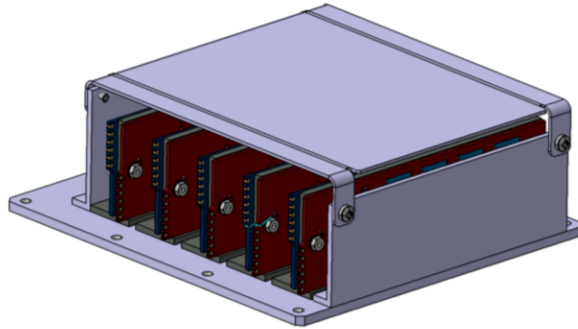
A simplified CAD drawing of the FEB box. The box contains 5 cooling shelves screwed to the base of the cooling plate.
